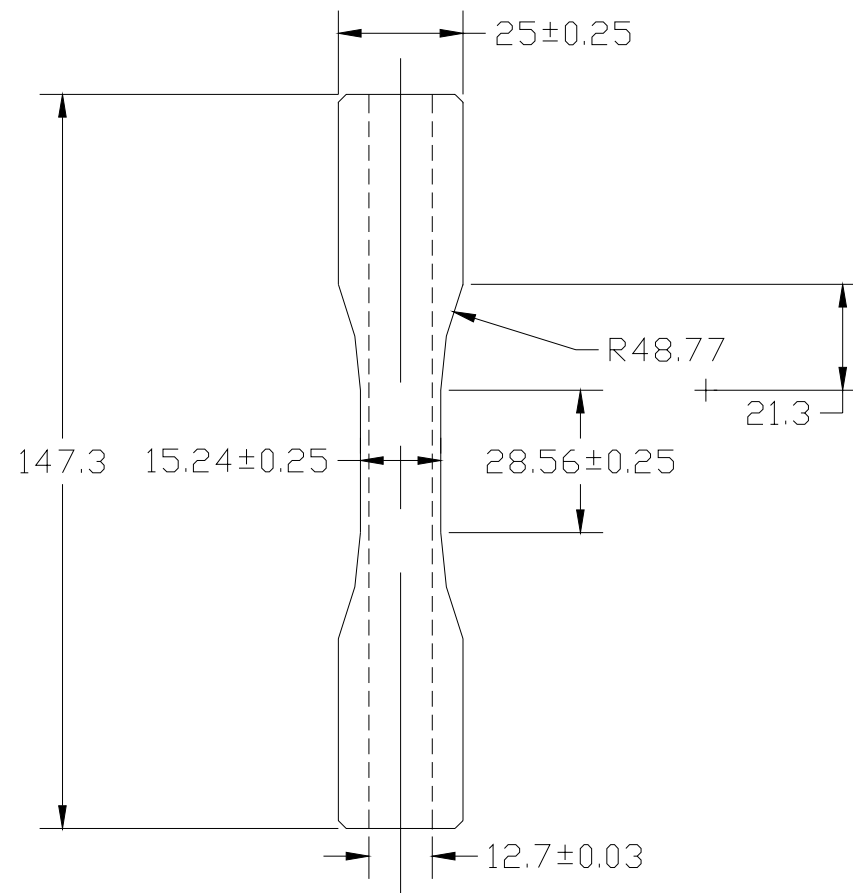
Specimen configuration and dimensions (all dimensions in millimeters)
